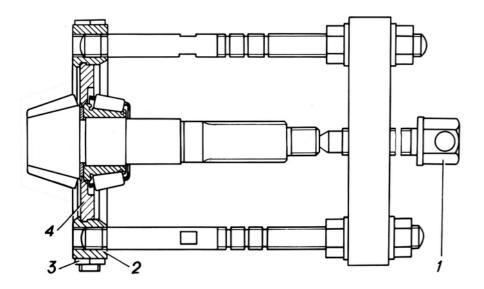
Bearing removal from the final drive gear: 1 – puller screw; 2 – support; 3 – nut; 4 – insert
